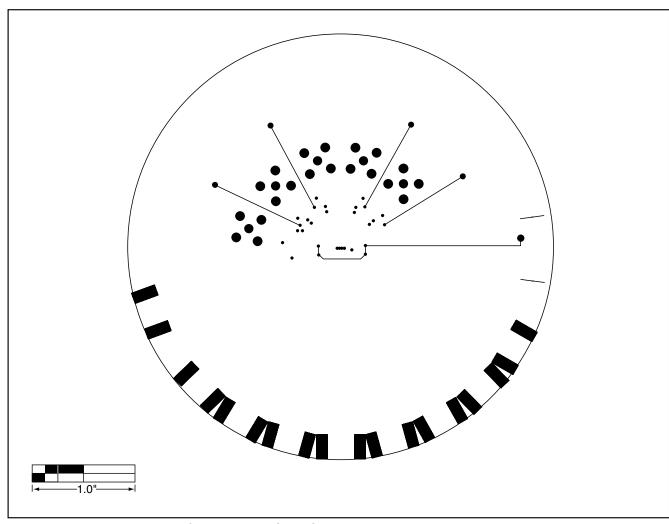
MAX3825 Evaluation Kit PC Board Layout—Solder Side
